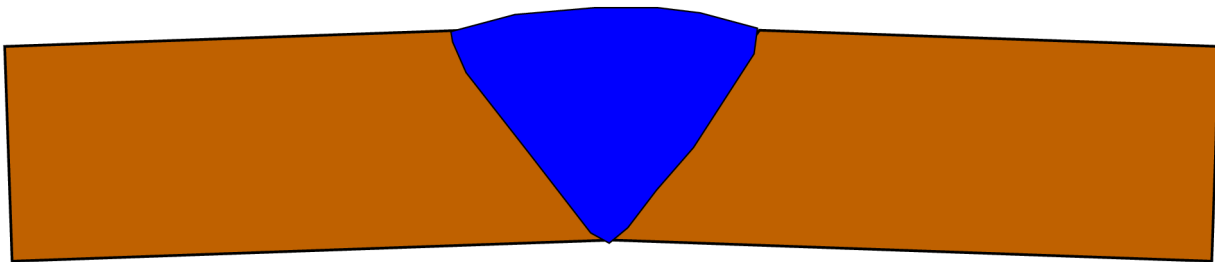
The connection is pre-bent before welding. When the joint has cooled down then the connection will be flat.
